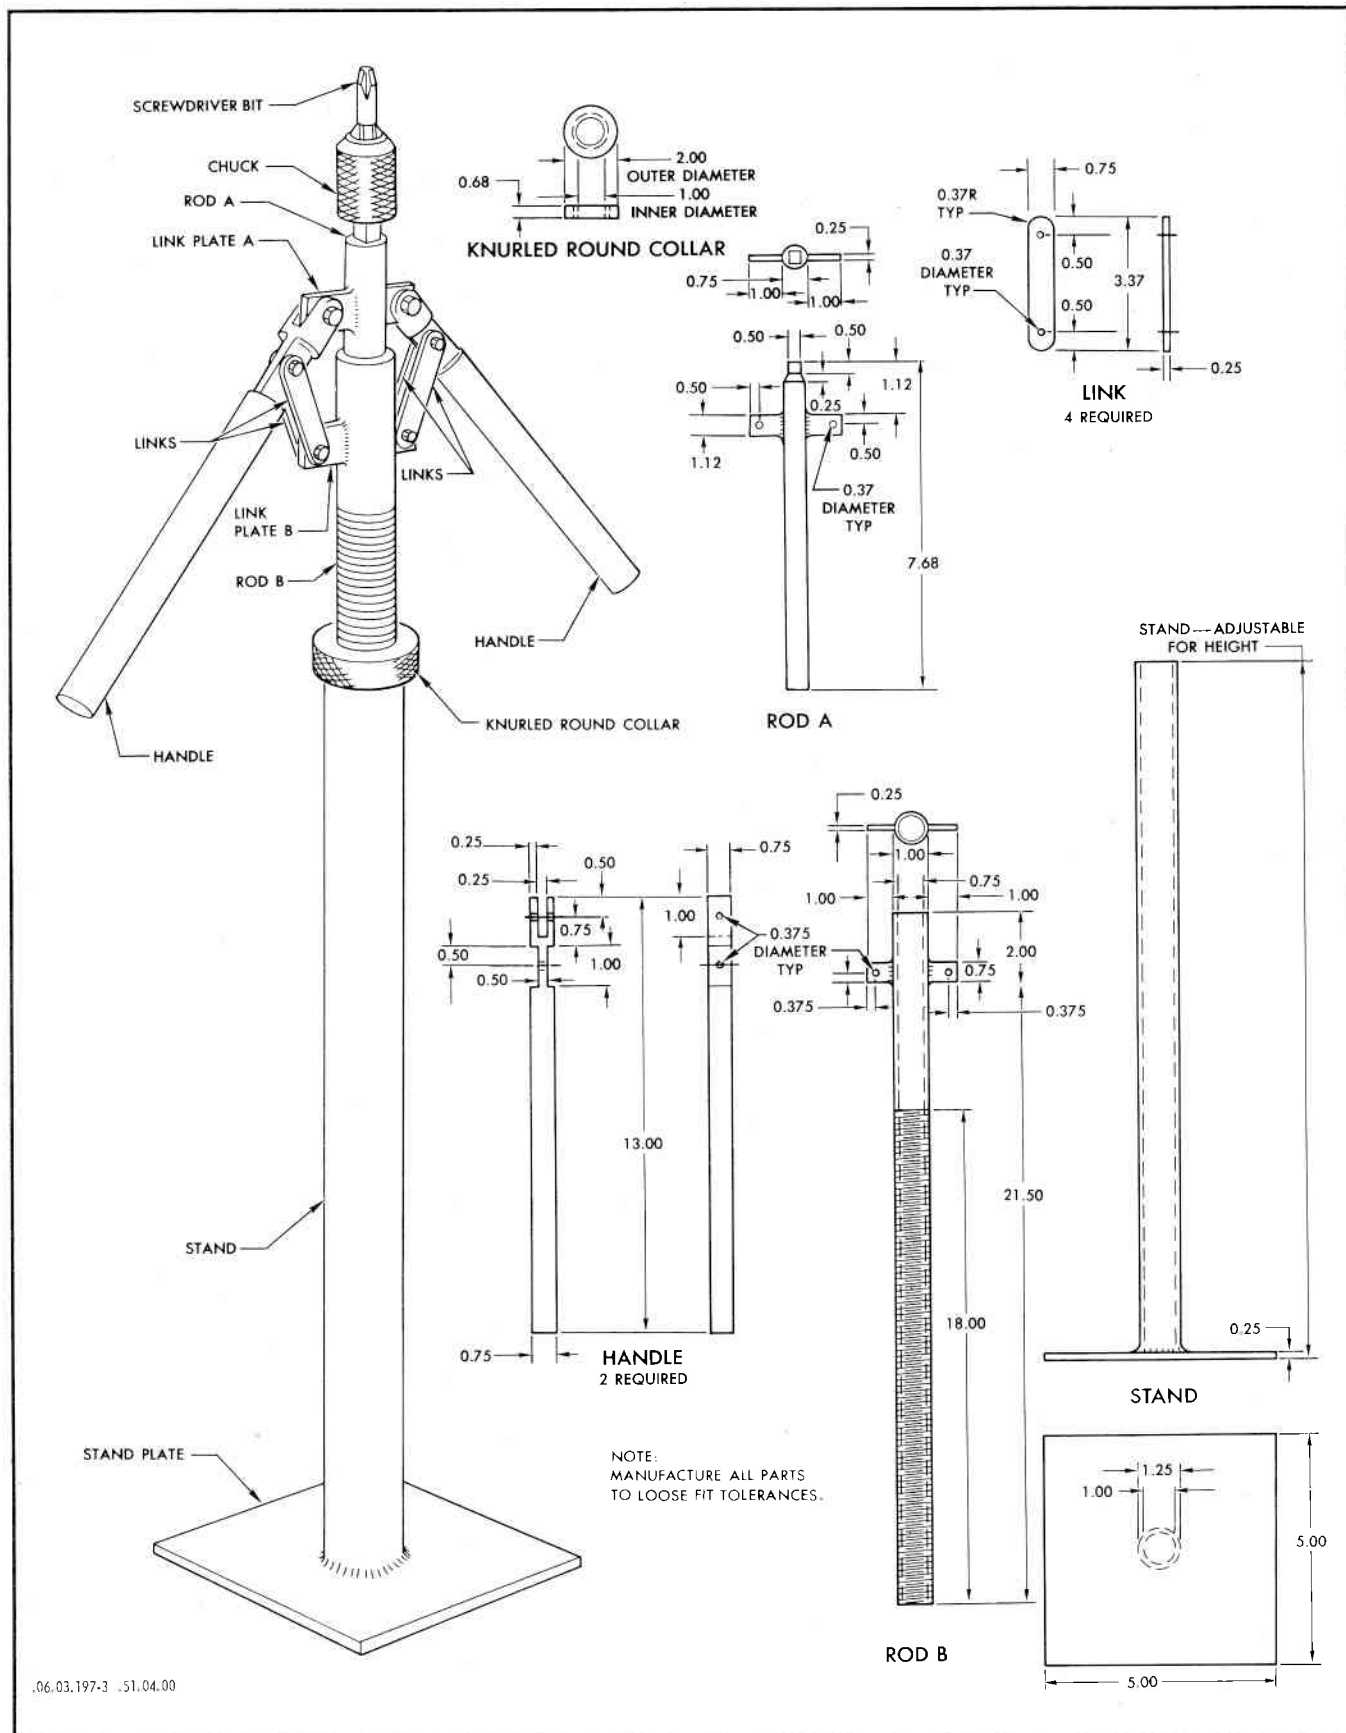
Frozen Screw Removal (Sheet 3 of 3)
